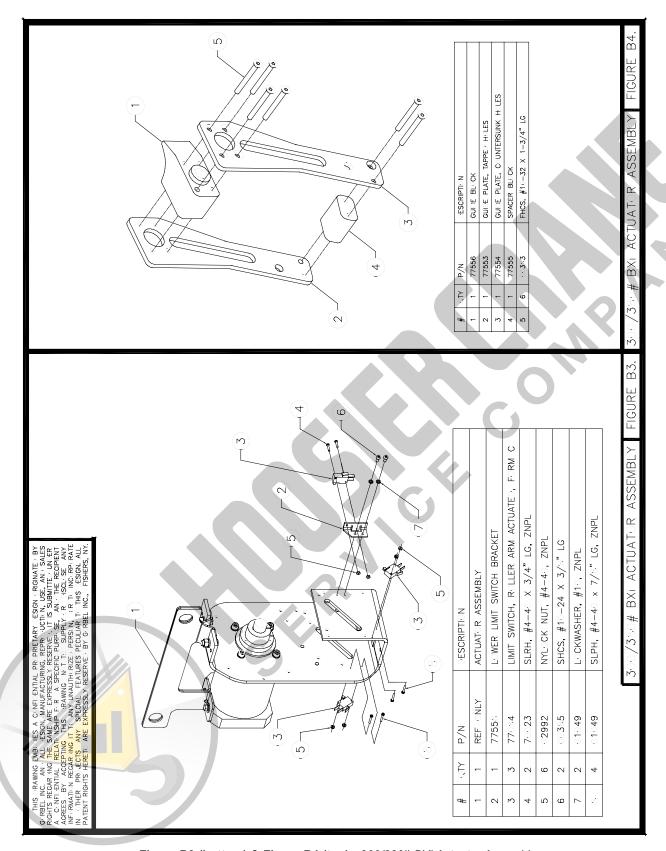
(bottom) & Figure B4 (top). 300/380# BXi Actuator Assembly.
